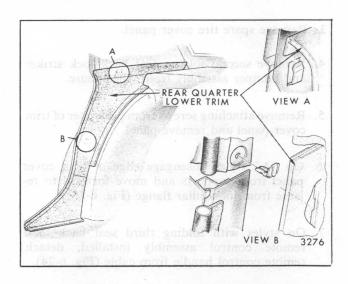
Quarter Trim Assembly Attachment - "C" Four-Door Styles
